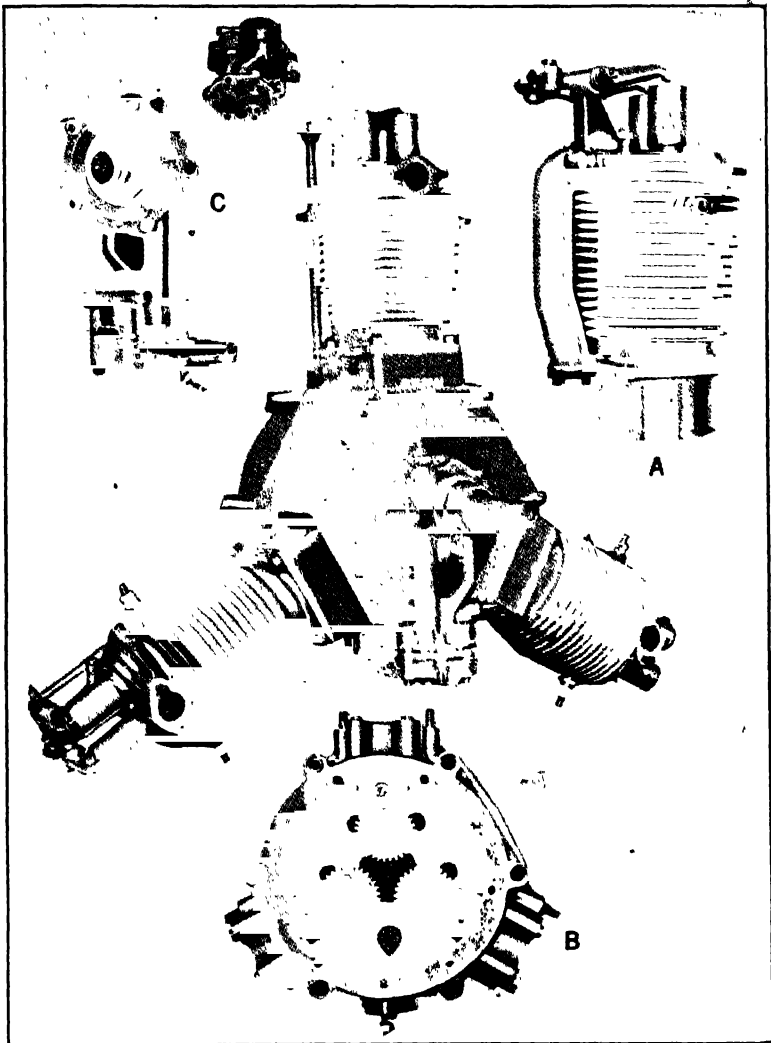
Szekeley Three-Cylinder Engine and Some of its Principal Parts. A—Cylinder Assembly. B—Timing Gears and Cams, Showing Tappet Actuators. C—Oil Pump Unit.
